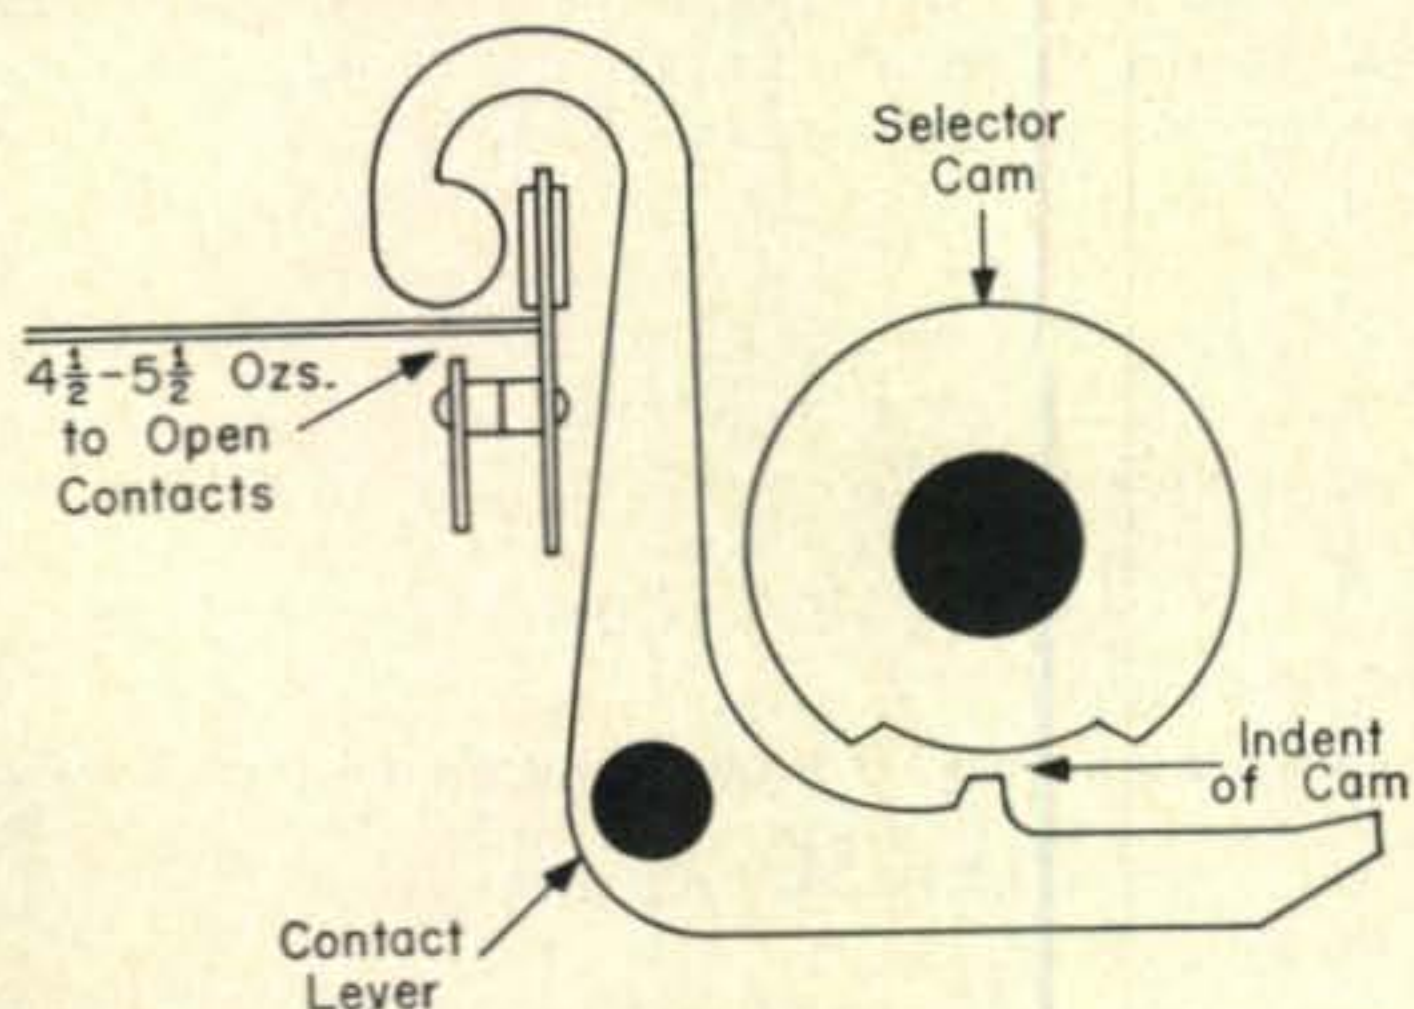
Contact lever, selector cam and switch contacts of one of the five character element forming mechanisms shown in fig. 126.
